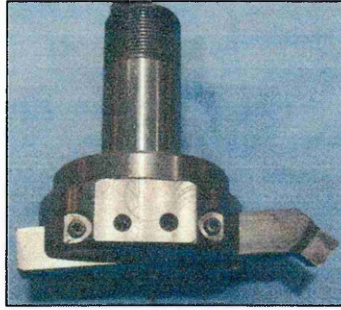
Conventional fly-cutting tool for a vertical milling machine
